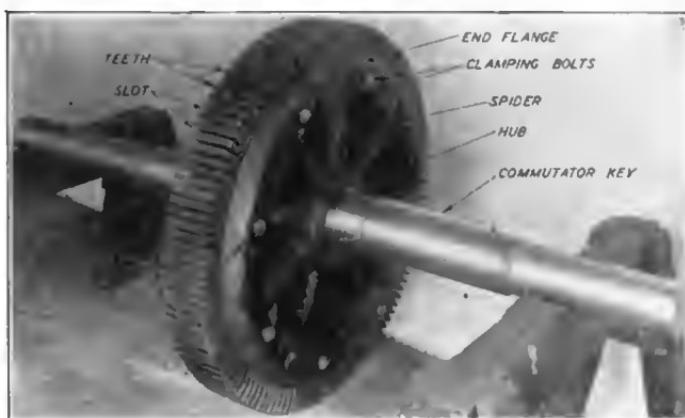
Rotor Assembly for a 6-Volt 7500-Ampere Generator
